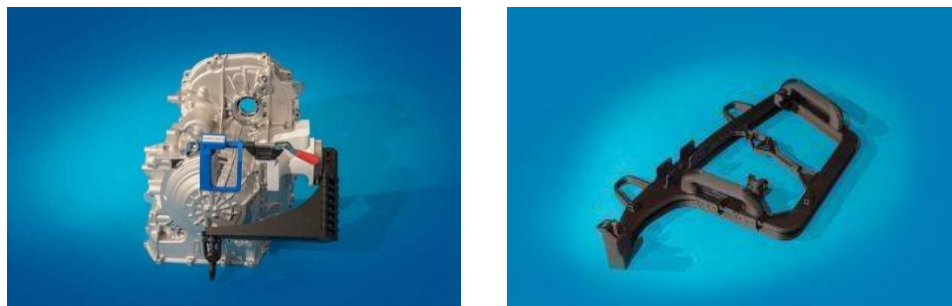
Assembly lift assist, on the left, and window alignment tool, on the right, used by Ford in the assembly plants.
